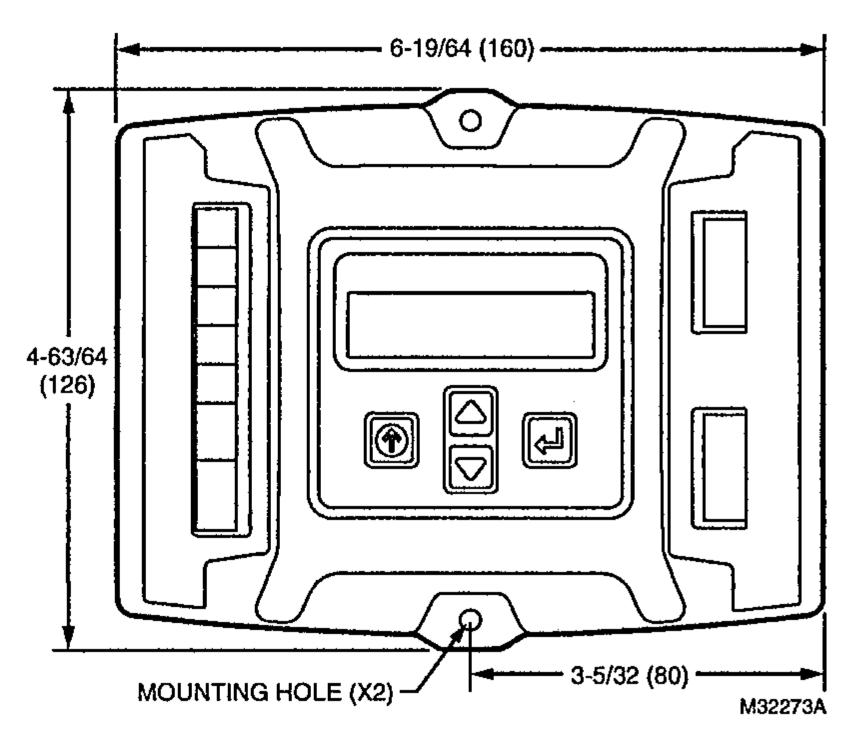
Dimensions in inches (mm) showing mounting holes.
